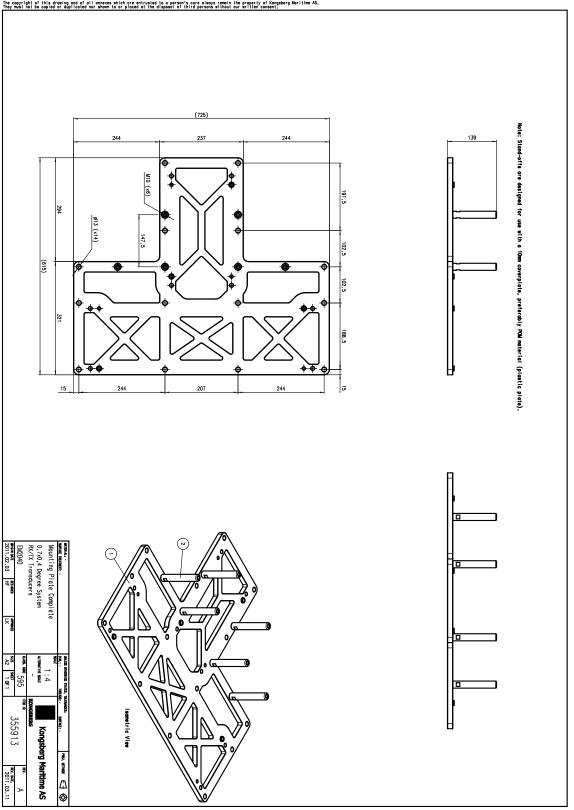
0.7 by 0.7 degree mounting plate – outline dimensions (Not to scale)
